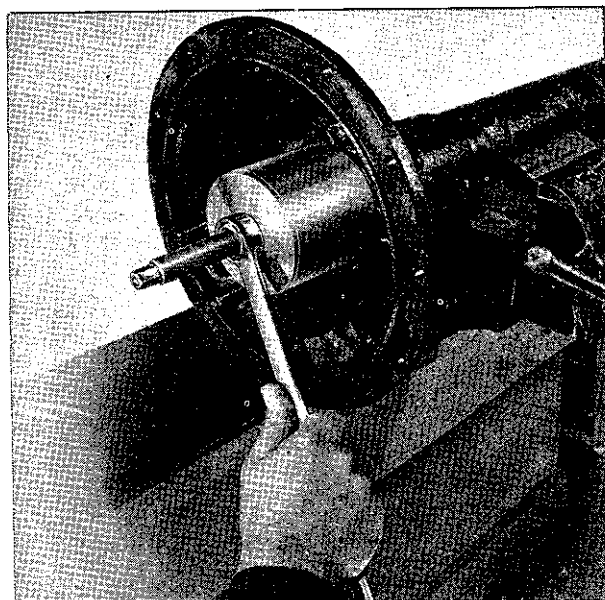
DIFFERENTIAL BEARING CUP PULLER
